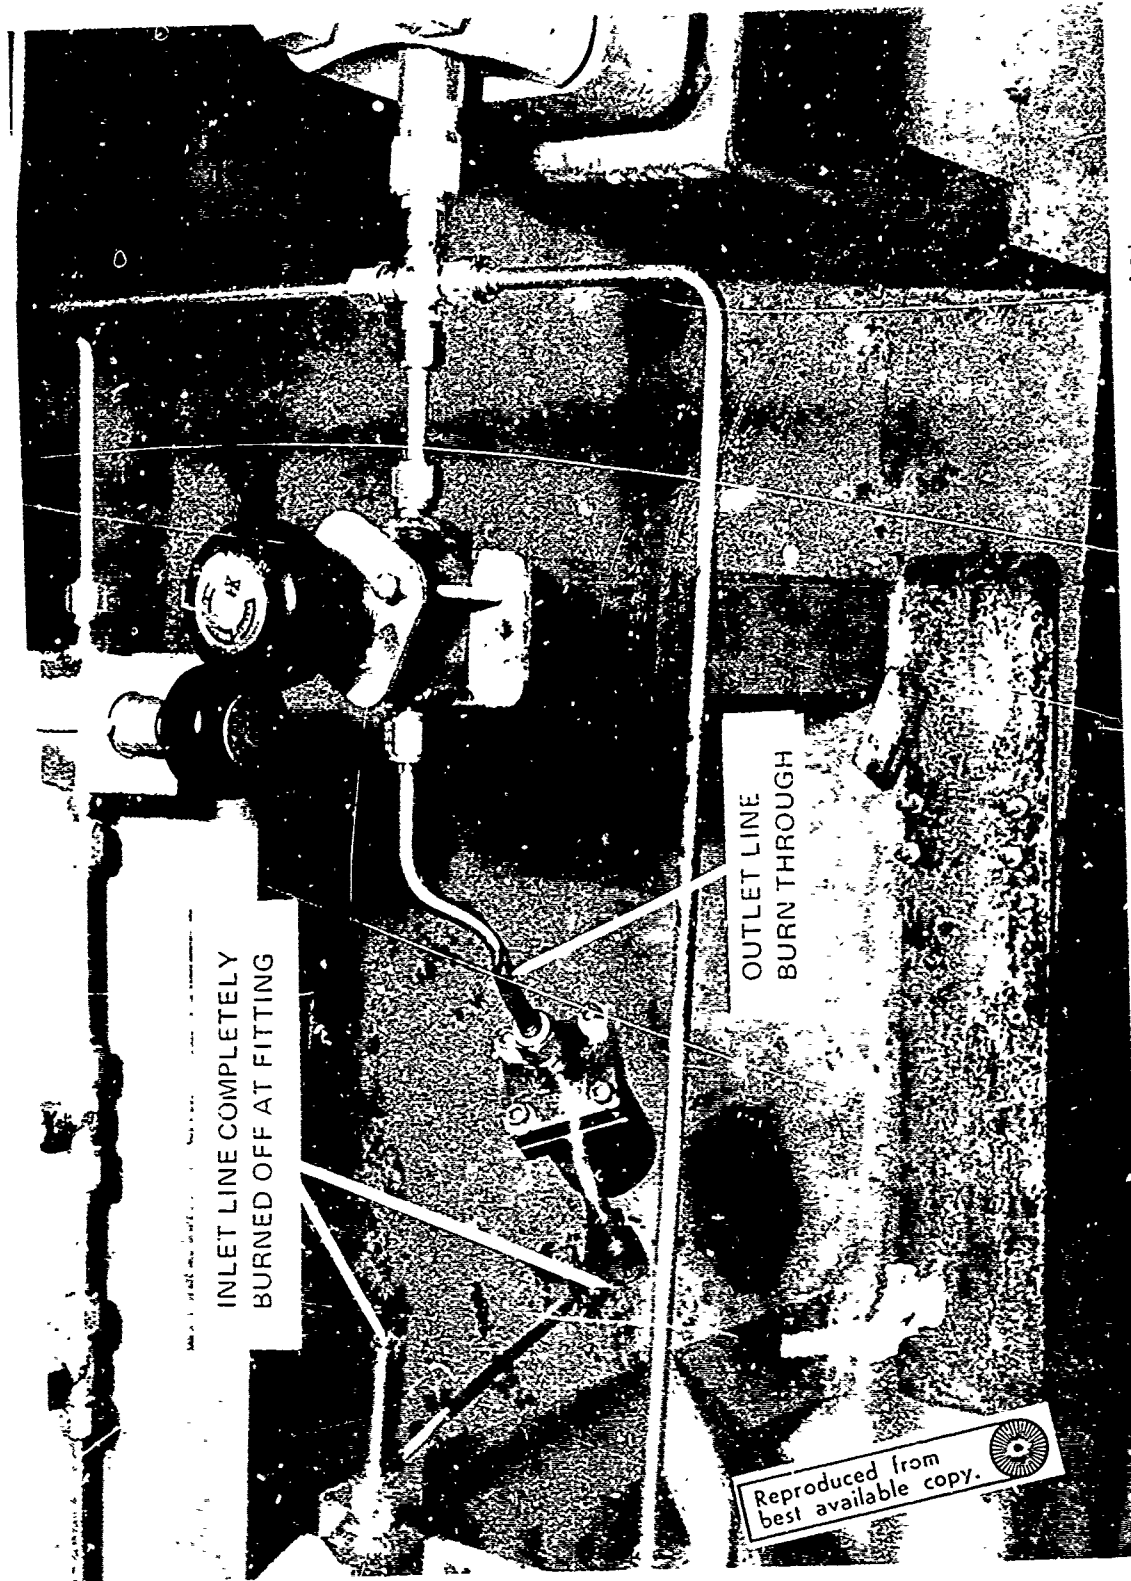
Marquardt Component Valve Burn Through (Post-Test 12)
